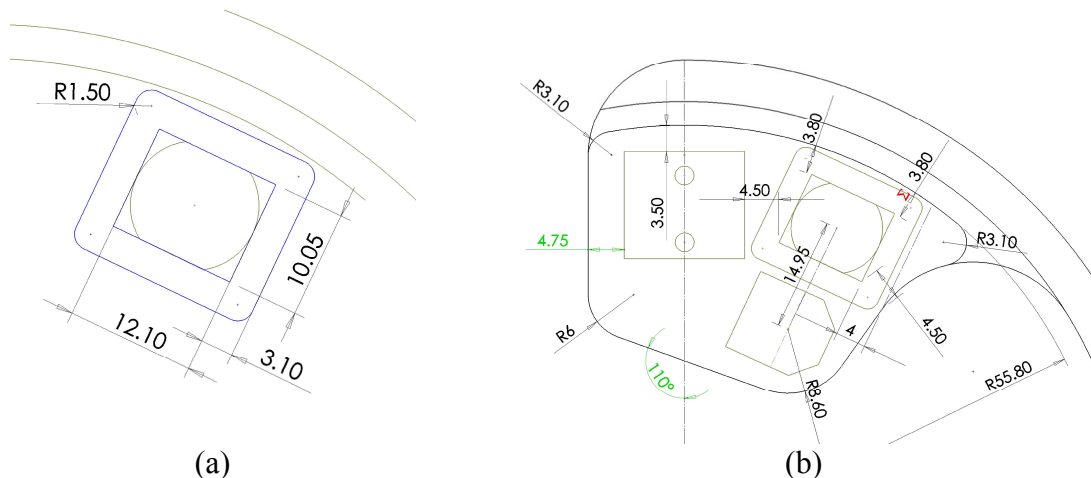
SolidWorks Blocks: Editing the Insert Block (a), and final hip design (b).
